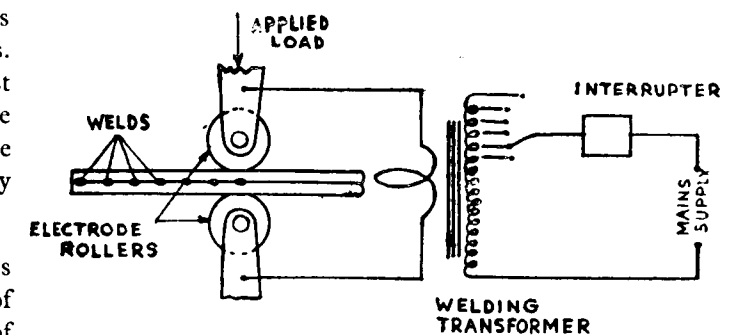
PRINCIPLES OF SEAM WELDING
